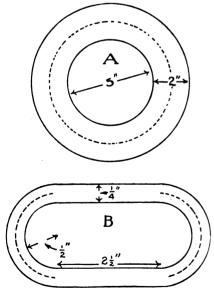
CALCULATING AMOUNT OF STOCK FOR FORGING IRREGULAR SHAPED PIECES.
